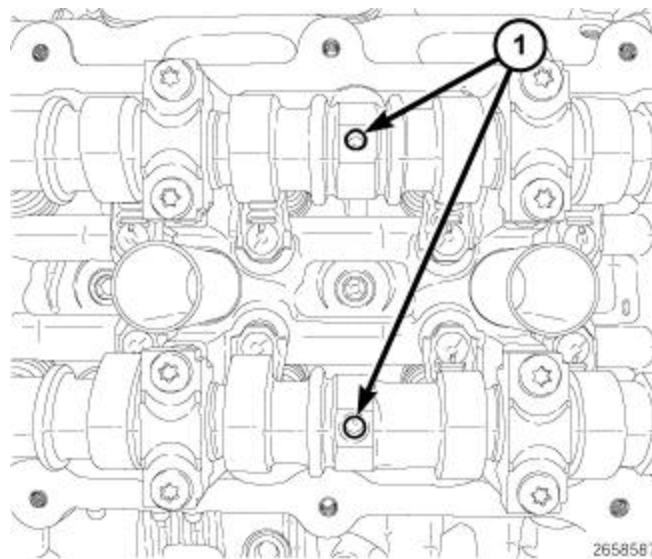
Positioning Camshaft Alignment Holes Vertically
